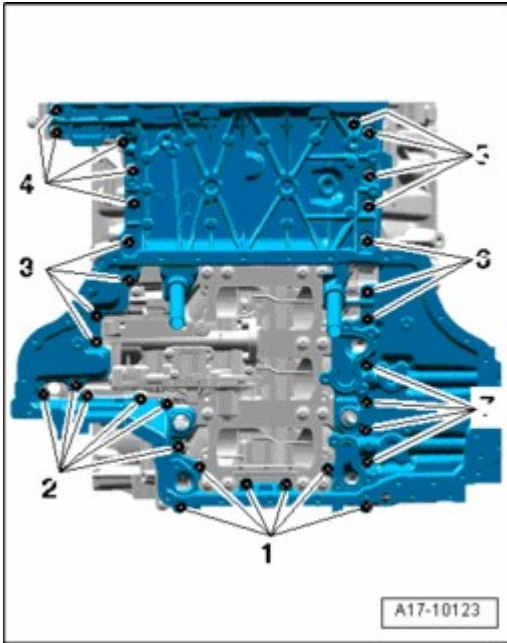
Removing/Installing Oil Pump & Bolts For Upper Section Of Oil Pan
